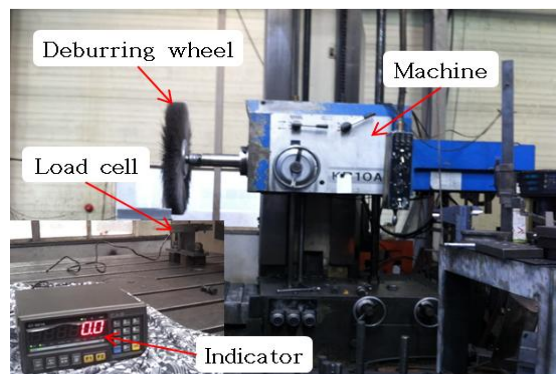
The machine of test for the deburring force and deburring radius value of deburring wheel
